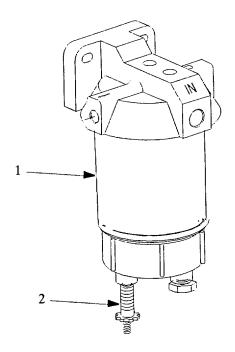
Filter Separator Servicing (Model 350 PAFN).
